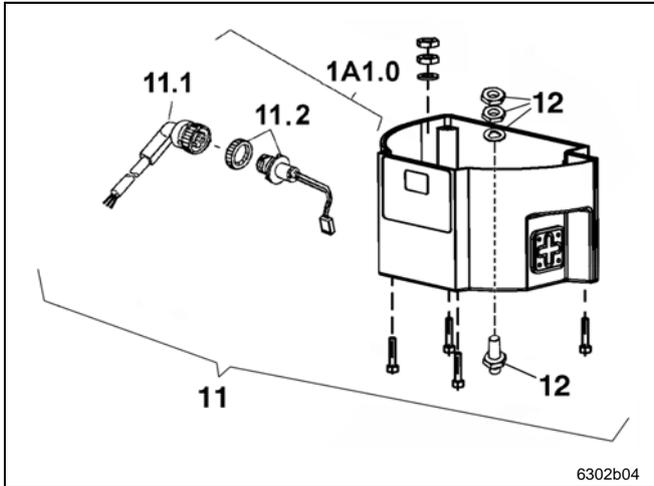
QLS 301 housing with bottom-mounted SSV metering device and bayonet plug (replacement of pos. 11, Fig. 49)
